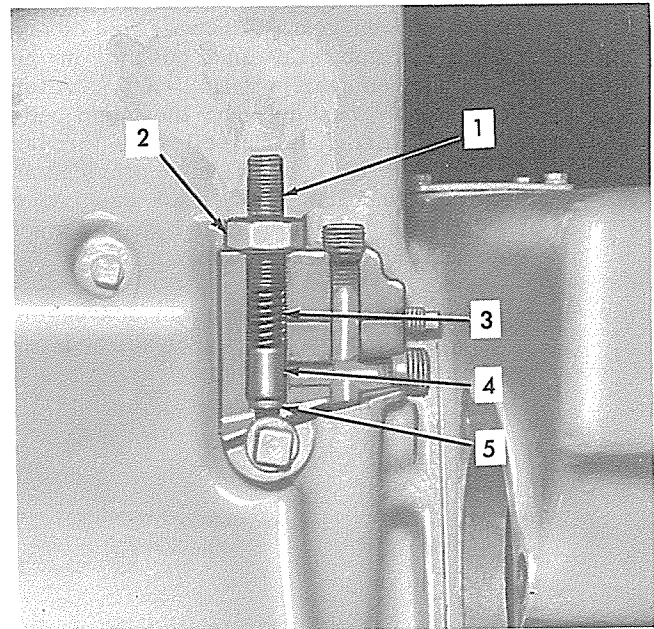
Oil Pressure Regulating Valve Cutaway View (T-18735)
